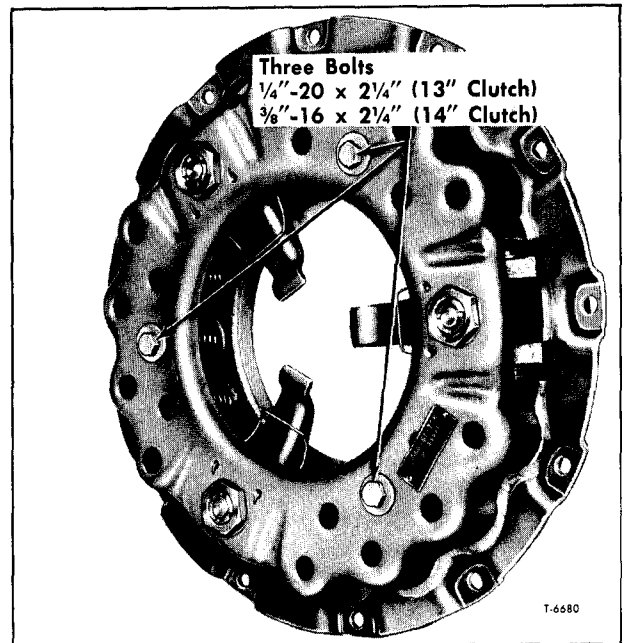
Clutch Cover Hold-Down Bolts (Lipe-Rollway Clutch)
